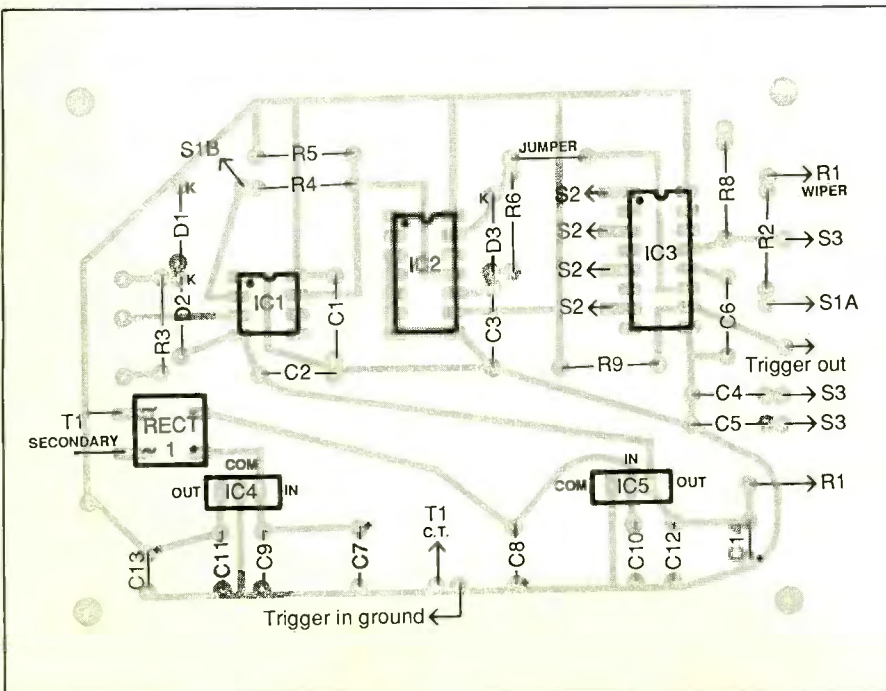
Wiring guide for pc board. Use this as component-placement guide if you wire circuit on perforated board.
